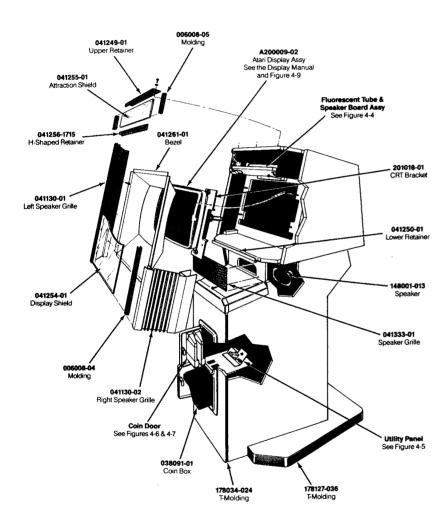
Cabinet-Mounted Assemblies A041300-01 A
